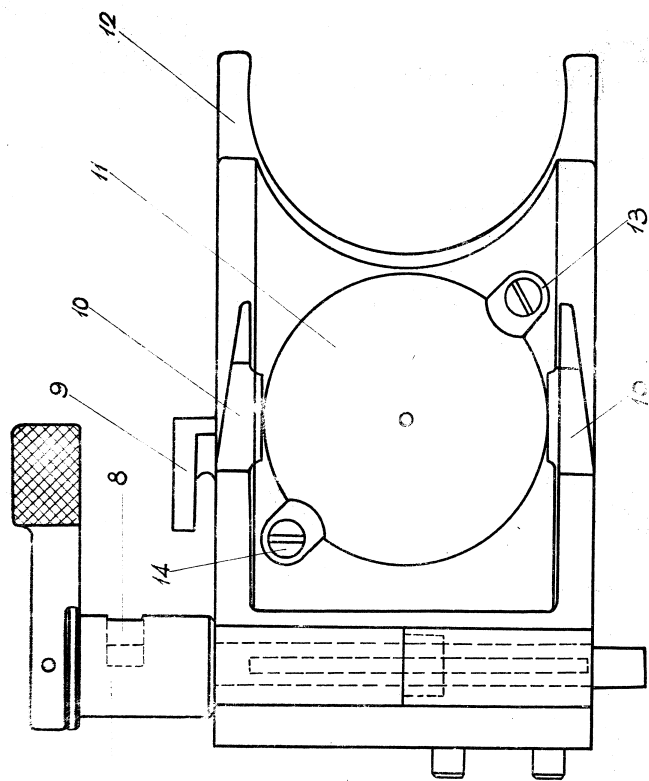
BREECHBLOCK ASSEMBLY (WITH THE FRONT PLATE)
